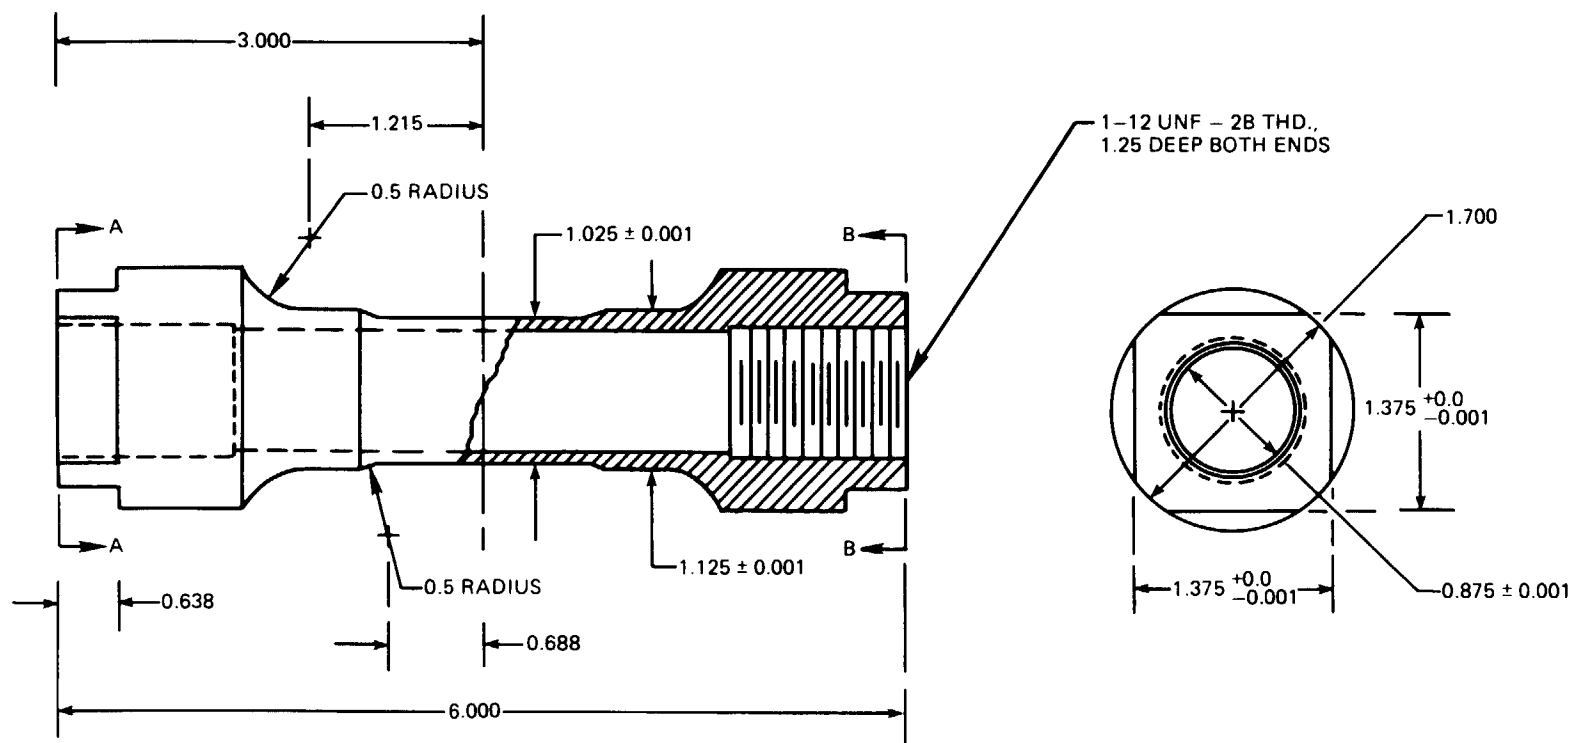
Schematic of the test specimen. Dimensions in inches.
